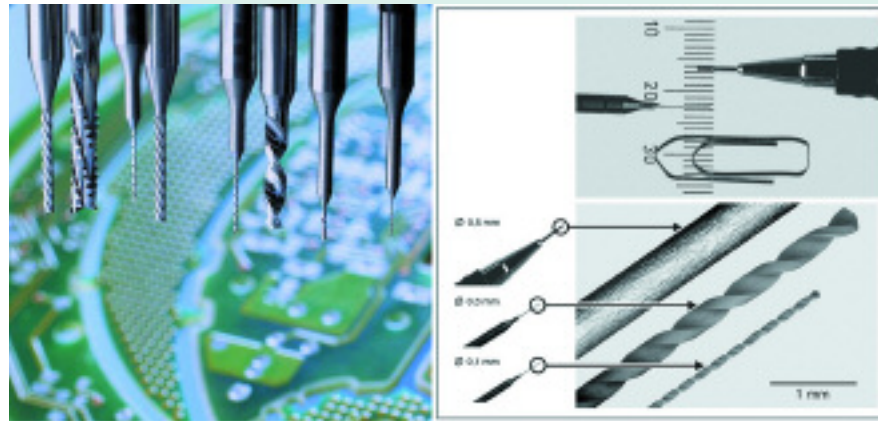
Carbide tools for PCB (printed circuit board) machining (left) and the latest generation of microdrills in comparison to a paper clip and a lead refill;
